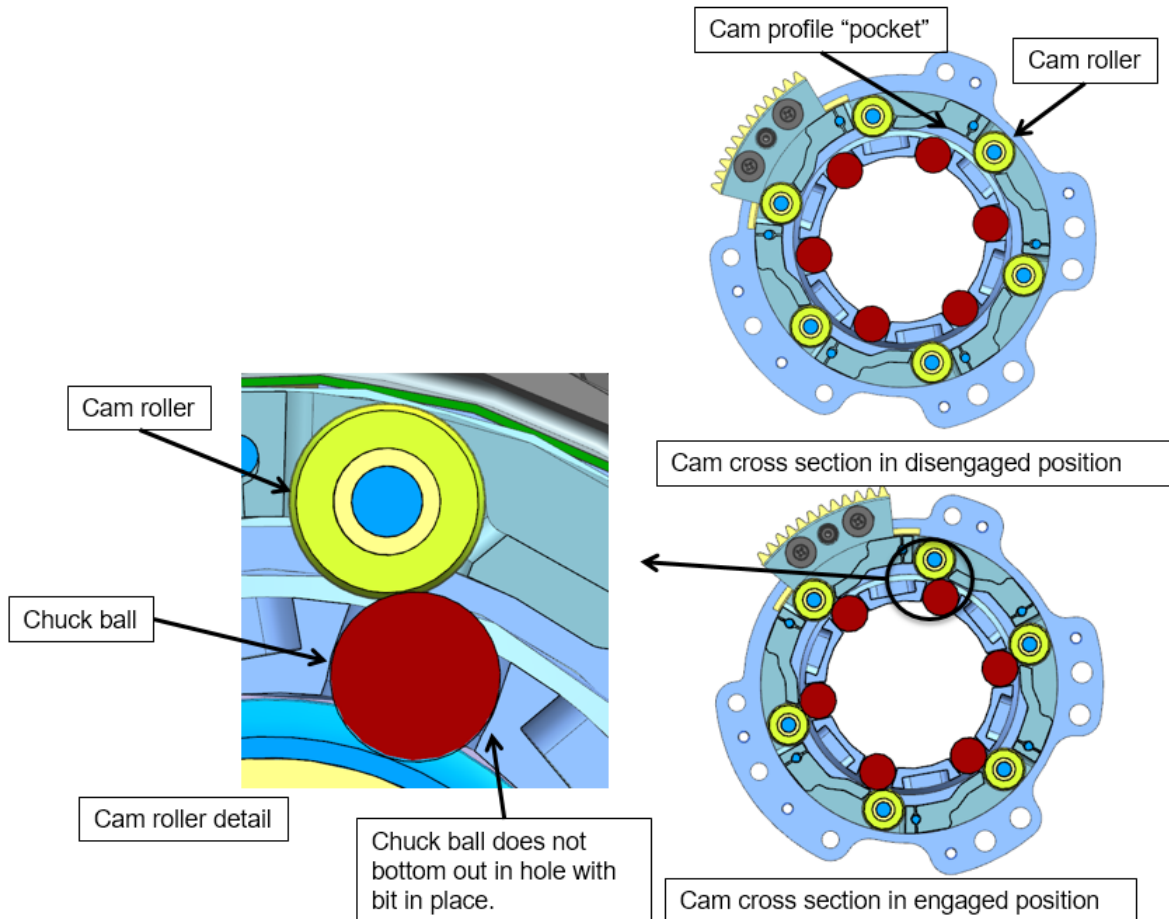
Cross sectional detail views of cam rollers, both in the engaged and disengaged states.
